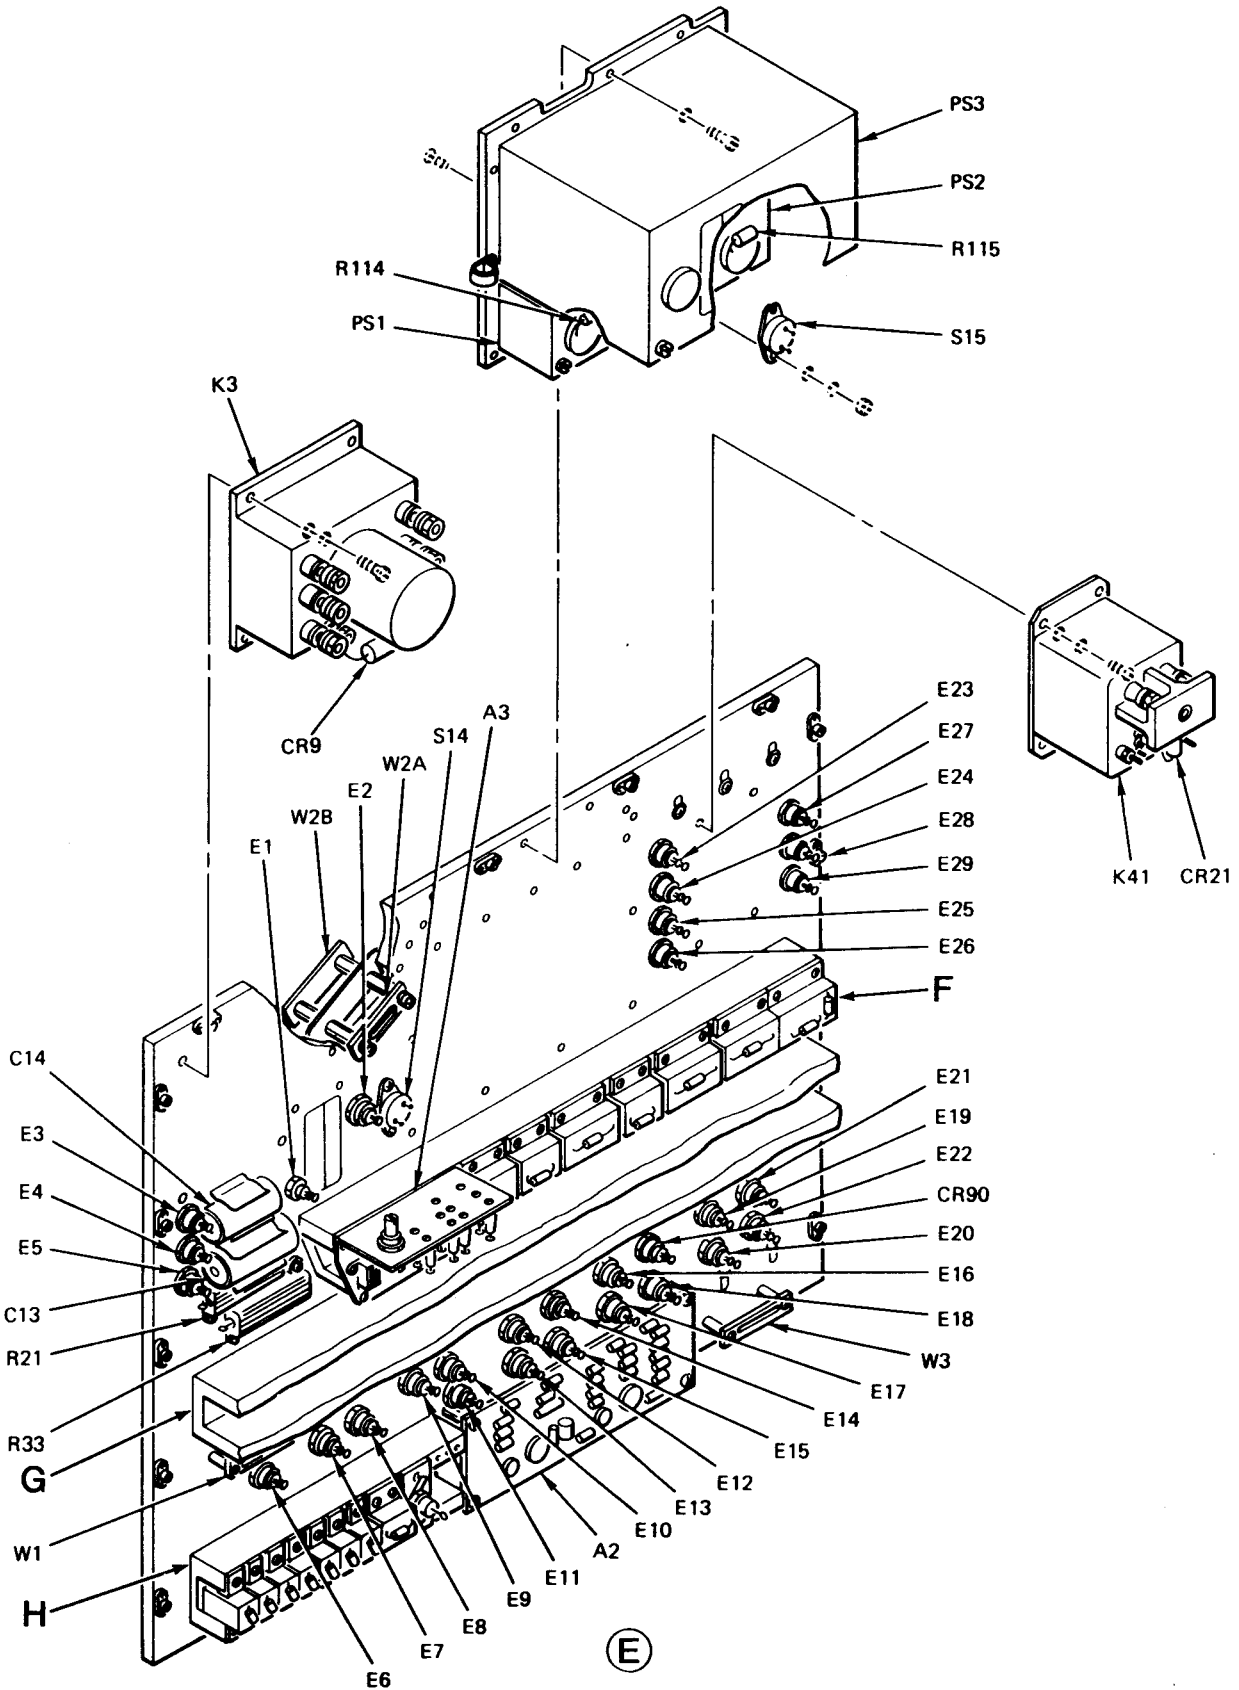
Power Supply Test Set Parts Location Diagram (Sheet 4 of 6)
